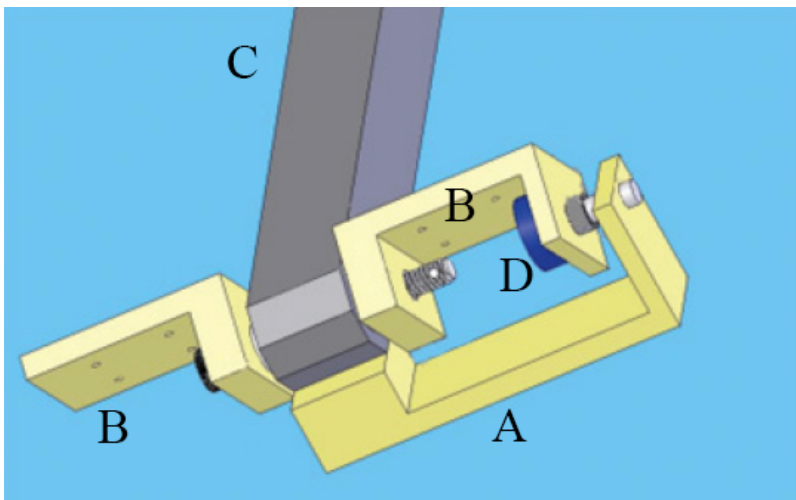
Hand configuration on mechanical arm. The dark grey beam represents the mechanical arm. Note the holes drilled in each of the two hands for attachment to a load. A: Potentiometer shaft mount. B: Hand with attachment points for board. C: Robotic arm, coupled to servomotor. D: Potentiometer.
